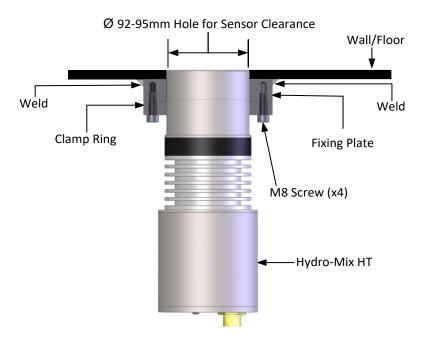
Sensor Installation (Fixing Plate Externally mounted)
